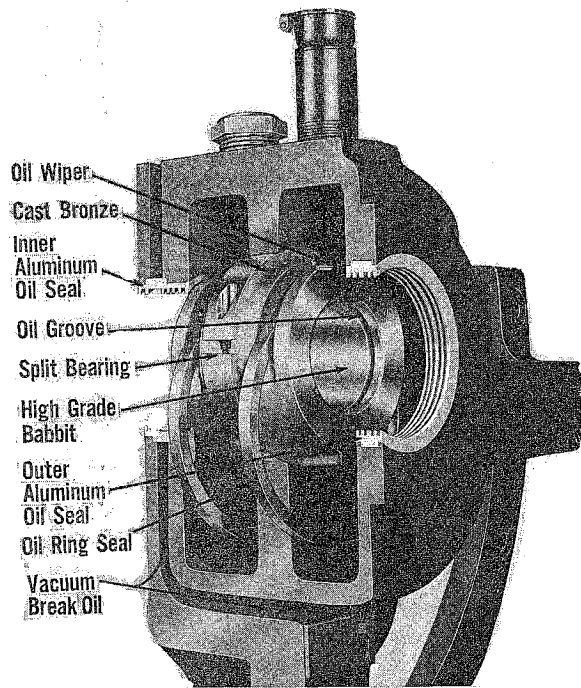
Description of the Ideal Electric patented oil lubricated sleeve bearing and housing.
